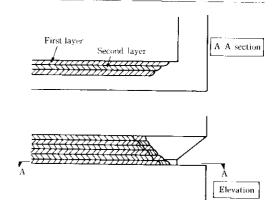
Laying process of weld beads for column-tocolumn connection
